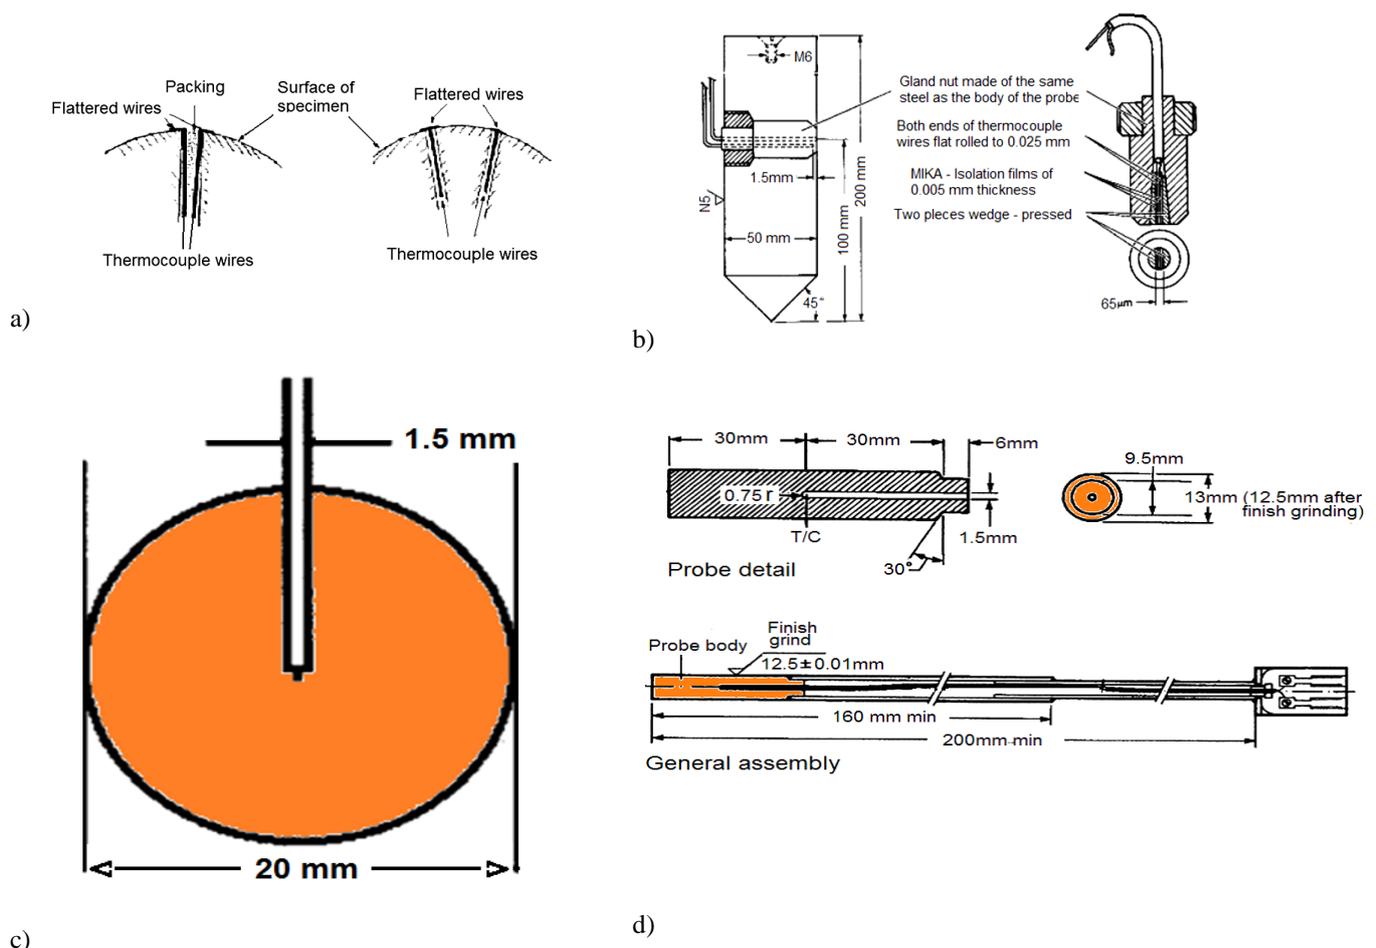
Evolution of test samples since 1928 up to date: a) are French samples with accurate thermocouples arrangement in their surfaces [3]; b) is silver standard probe 20 mm in diameter used in Former Soviet Union (FSU) [18]; c) is accurately designed Liscic/Nanmac probe (currently replaced by Liscic probe with three thermocouples) to investigate quenching processes taking place on the surface of metal [17]; d) is standard Inconel 600 probe 12.5 mm in diameter currently used for testing different kinds of quenchant [19, 20].
